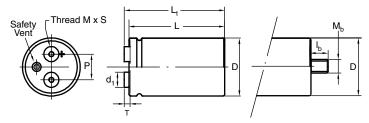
B: High current M6-18 mm disc and 1/4-28 UNF disc: Screw Terminal (ST) and Screw Terminal Bolt nut (STB)
